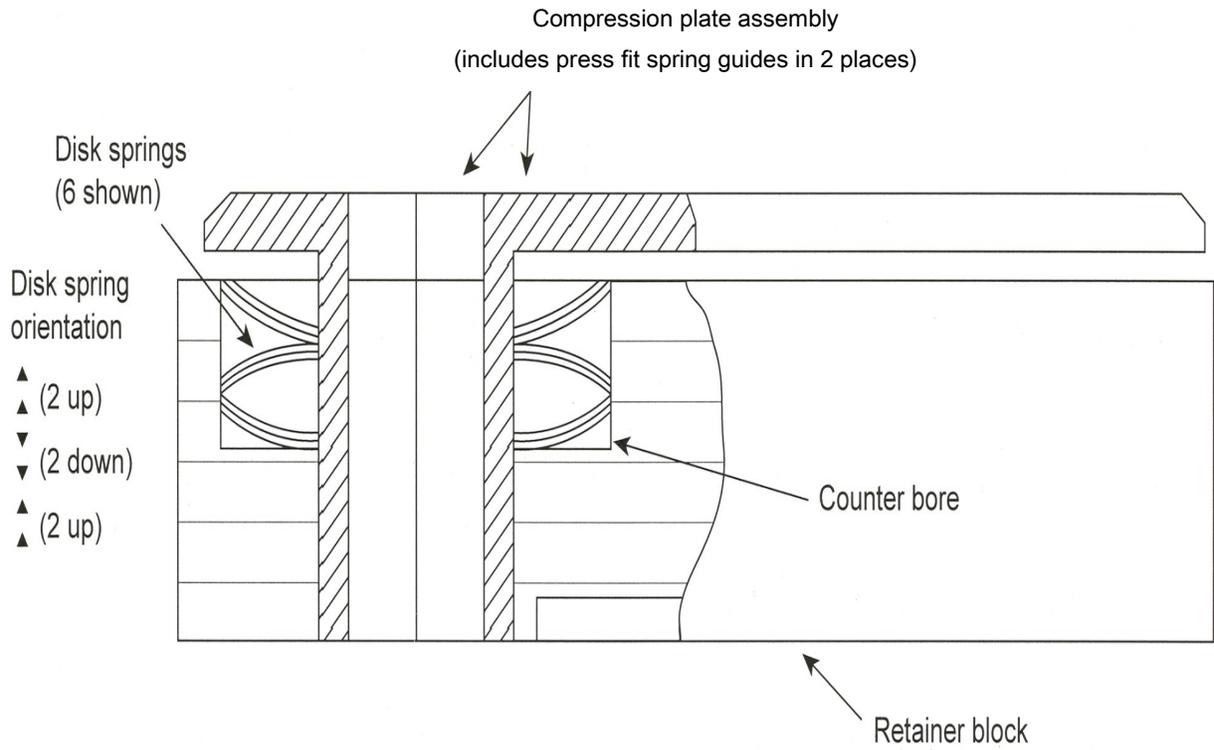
Cam Handle Tiedown Assembly Disk Spring Arrangement
